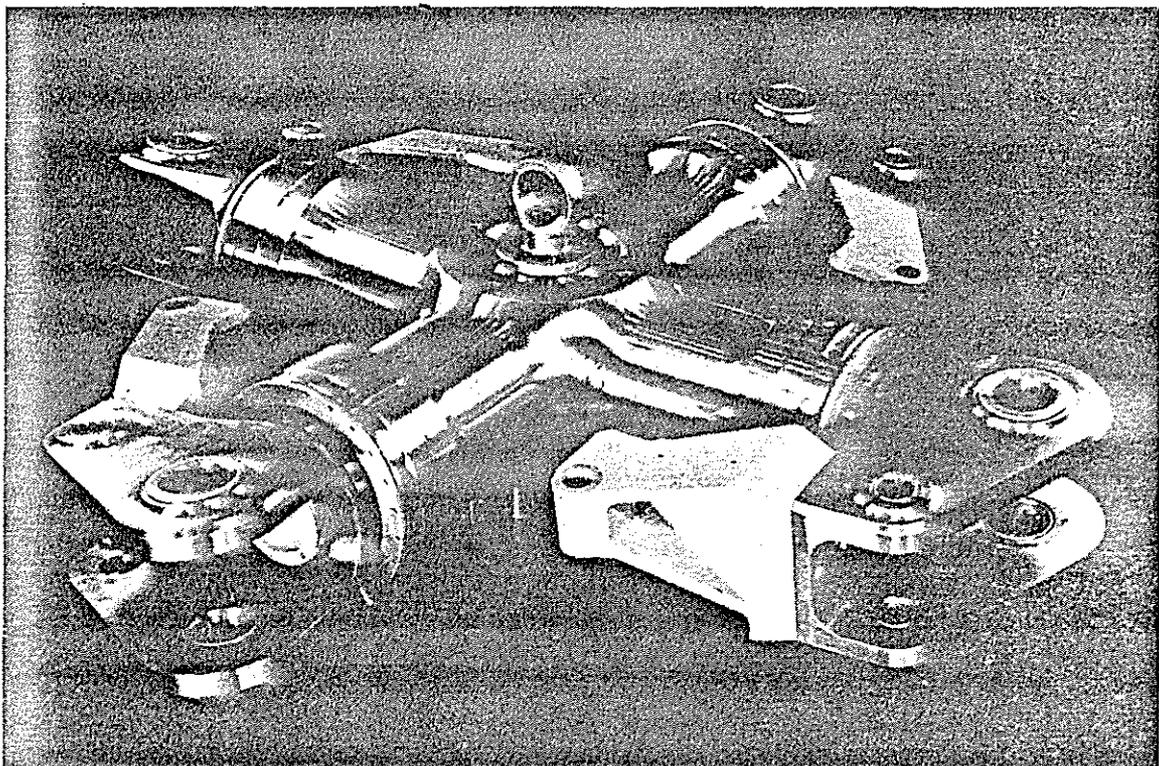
BK 117 / BO 105 Rotorhead Assembly
